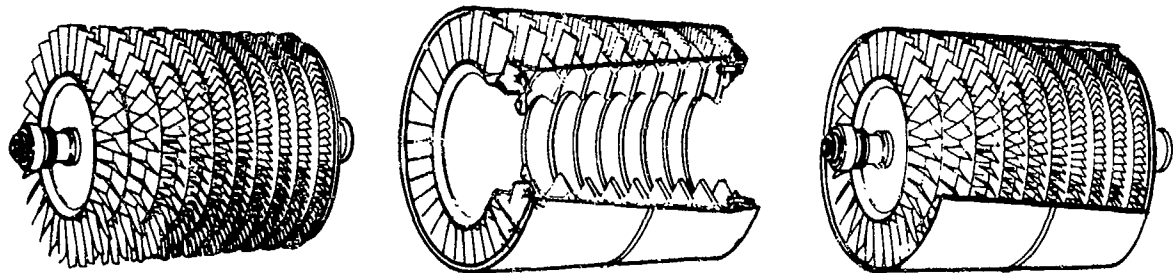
COMPONENTS AND ASSEMBLY OF AXIAL FLOW COMPRESSOR
